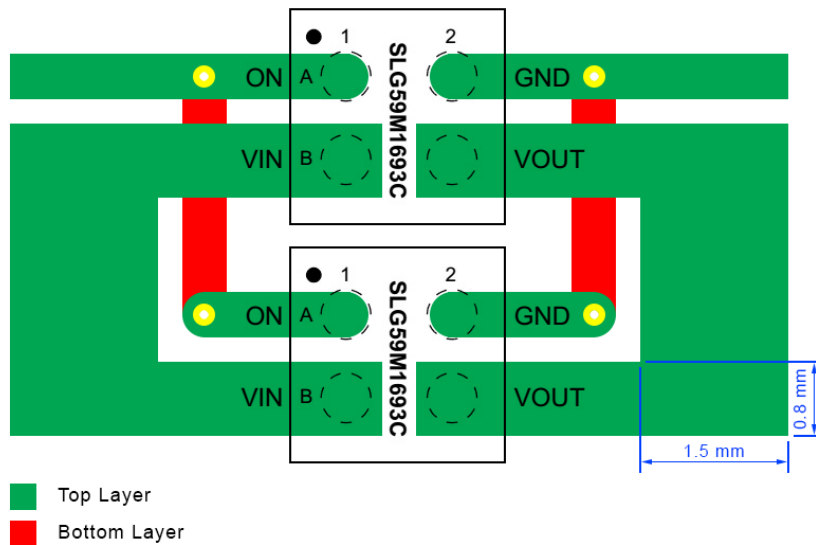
PCB Layout for Using SLG59M1693C in Parallel
